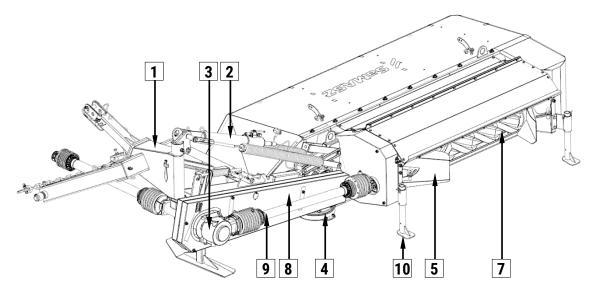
Parts of SaMASZ rear disc mower with tine conditioner
